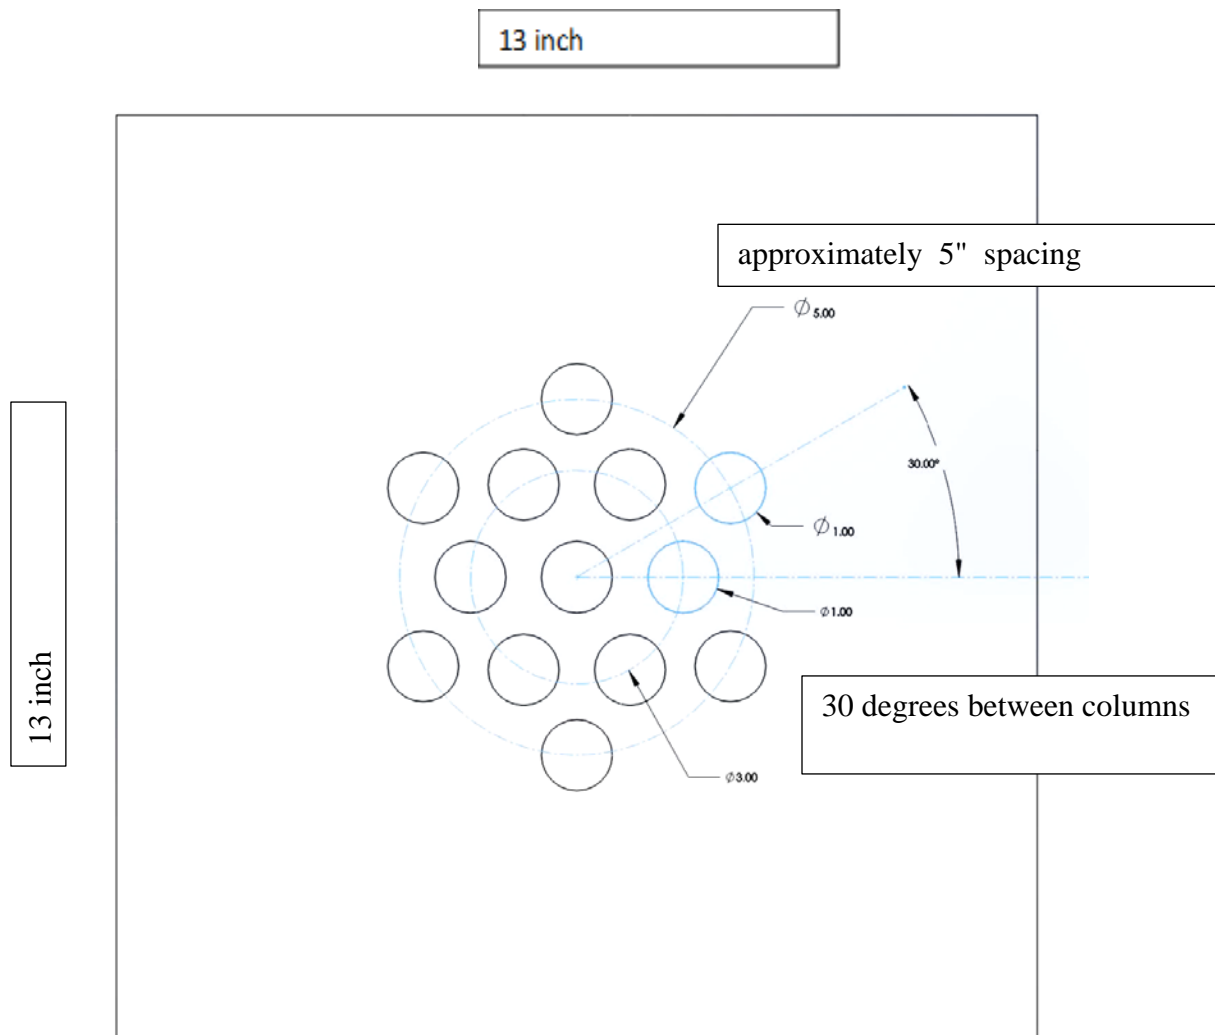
Detailed Sensor Layout 13 in x 13 in Flat Plate
